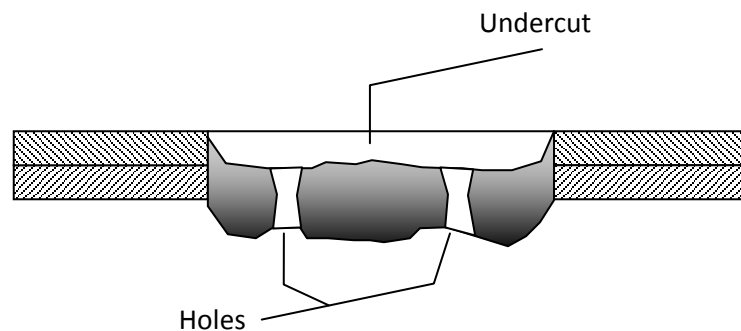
Schematic: longitudinal weld section showing undercut, dropout and holes
